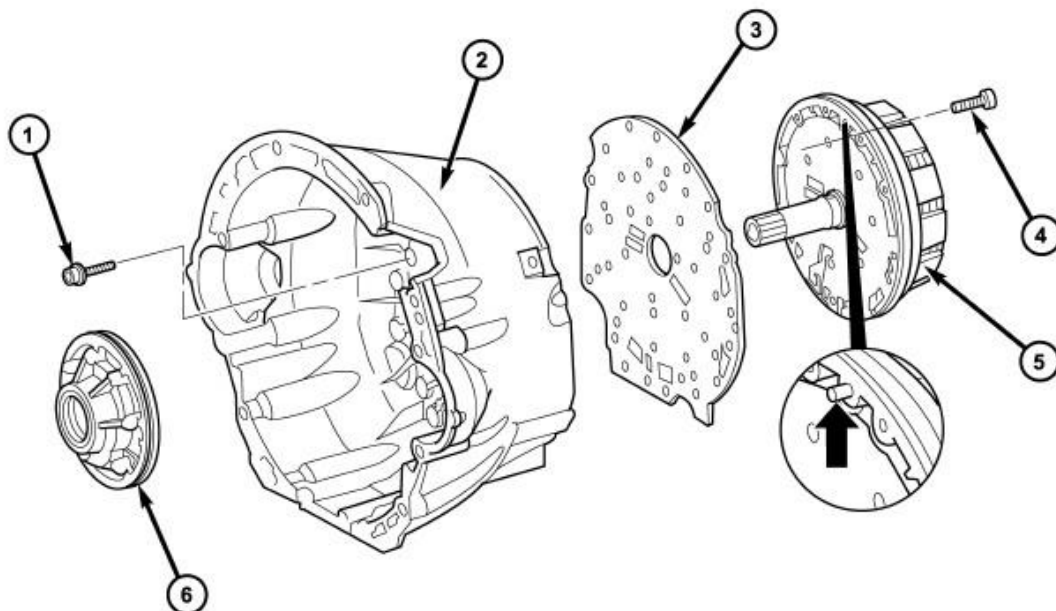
Remove/Install Holding Clutch B1 and Oil Pump
